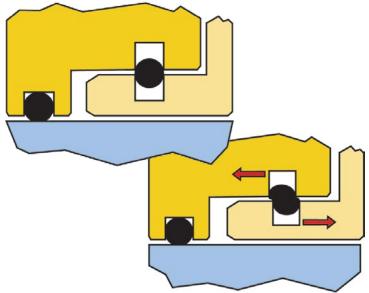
Bearing protector geometry where a dynamic O-ring could inadvertently make radial contact with sharp edges, i.e., a pinched O-ring (courtesy of ASSEAL, Inc.)
